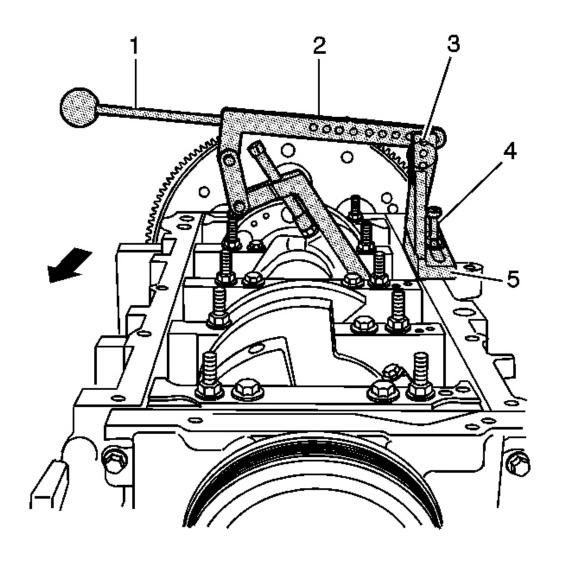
View Of Special Tool Installed On Engine Block Courtesy of GENERAL MOTORS CORP.
